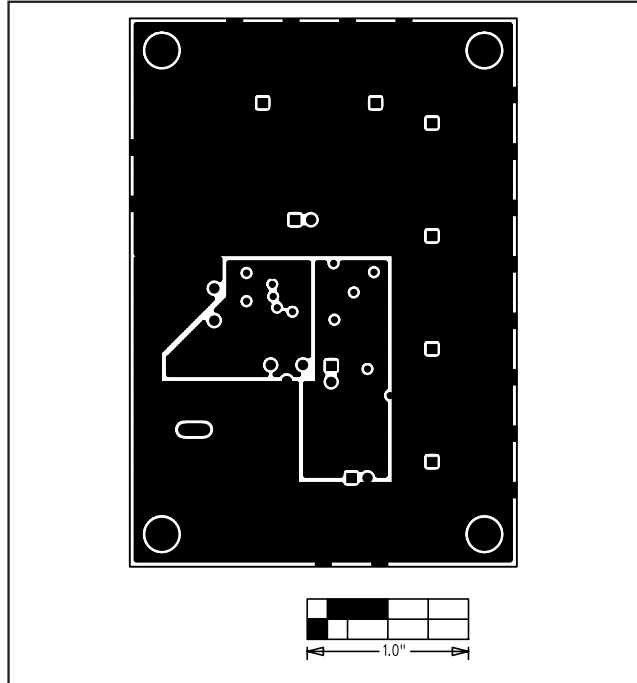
MAX9486 EV Kit PC Board Layout—Solder Side
